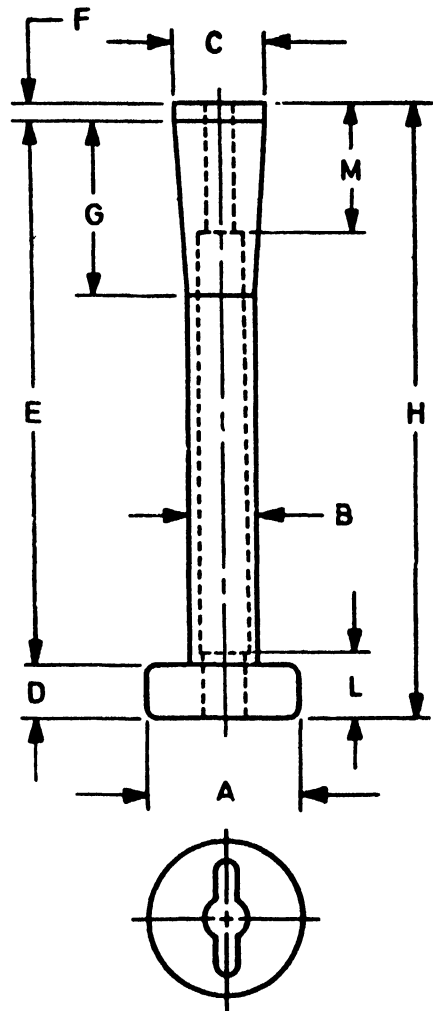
A TYPICAL TAPER-BUILD (TAPERED-HEAD) BOBBIN
